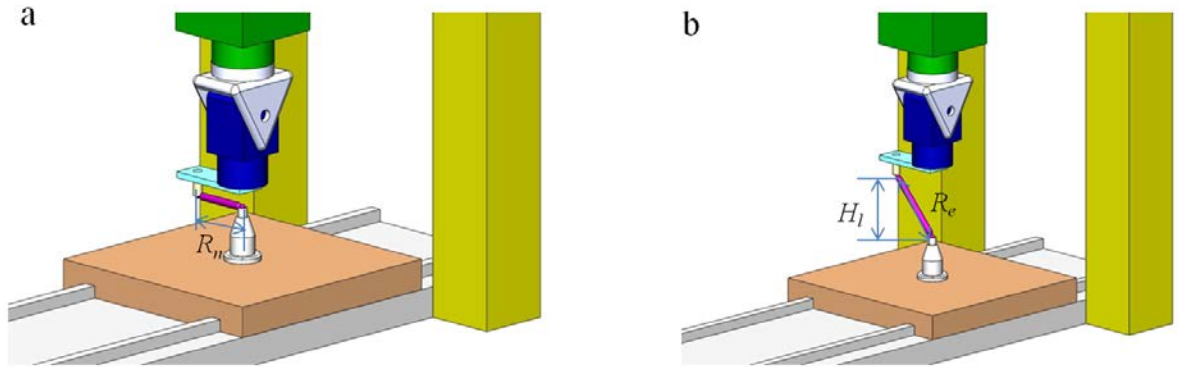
the C-axis tests for a tilting head 5-axis machine tools.
